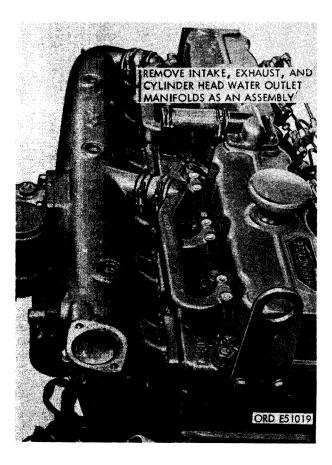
REMOVING OR INSTALLING INTAKE, EXHAUST, AND CYLINDER HEAD WATER OUTLET MANIFOLDS AT CYLINDER HEAD ASSEMBLIES -TOP VIEW.
